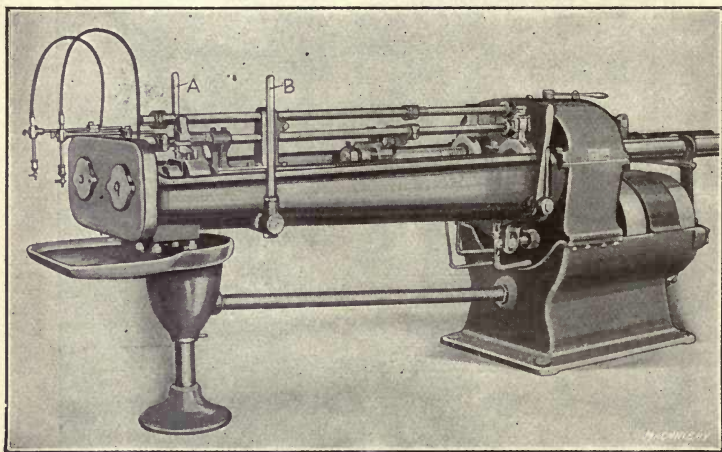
Duplex Broaching Machine made by the J. N. Lapointe Co.
